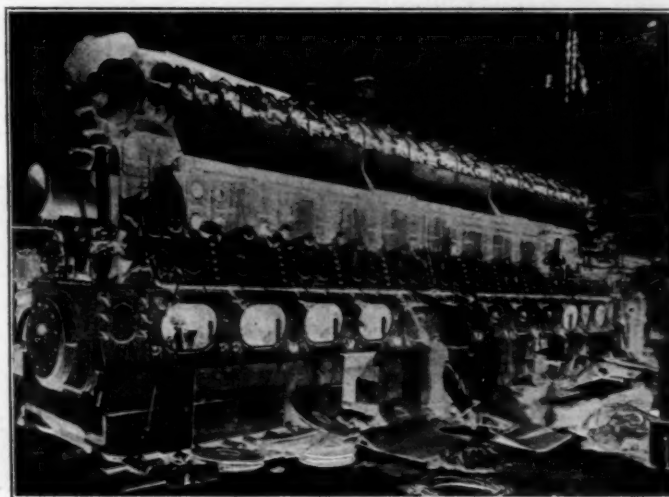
VIEW OF THE 3000-HP. ENGINE WHICH WEIGHS 14,000 LB.
